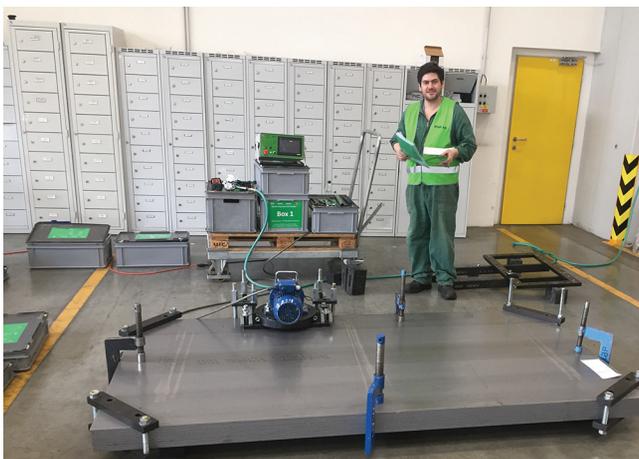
20 pieces, 6mm steel sheets stacked MEMV®, no distortion after laser machining (hpw)
